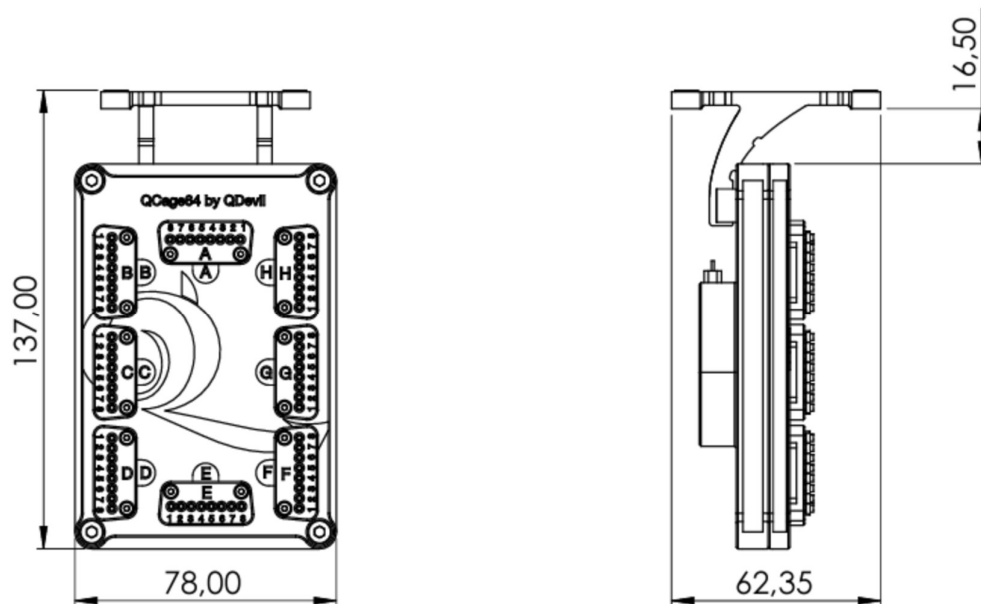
CAD drawing of the standalone configuration. All measures are given in mm. Left) Front view. Right) Side view.
